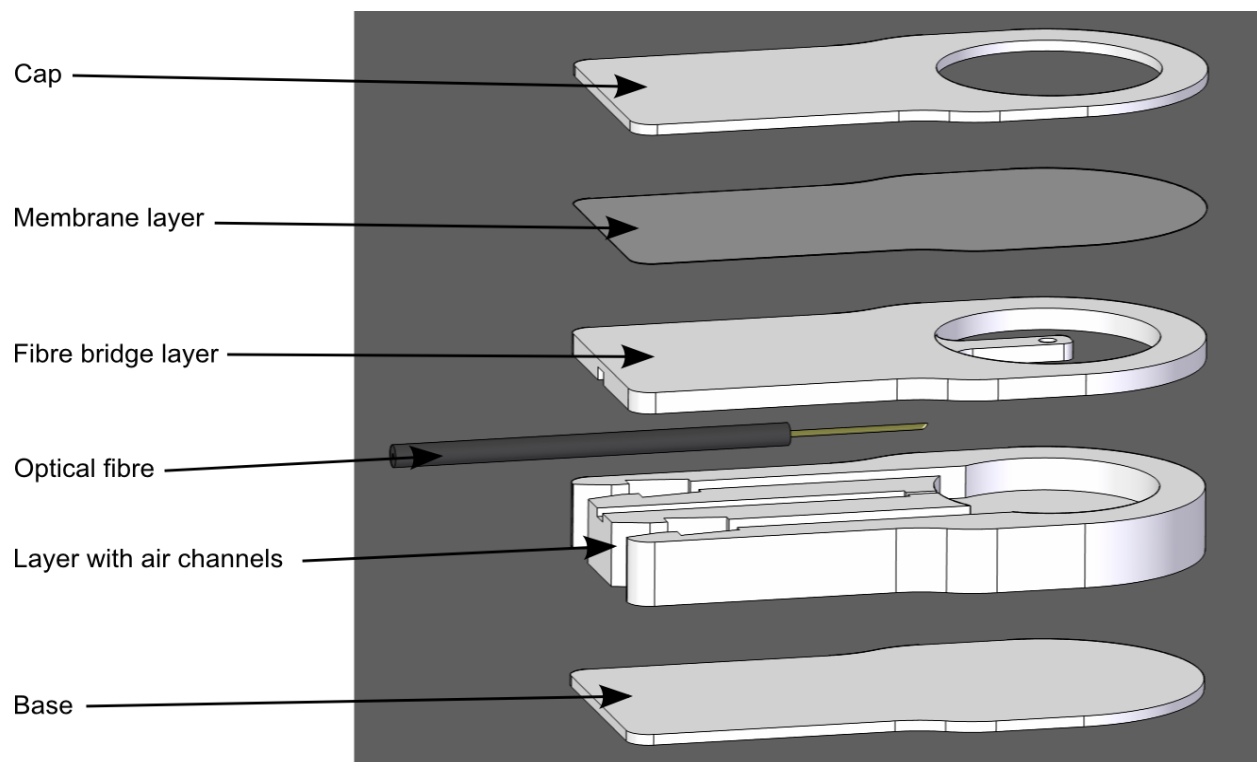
An exploded view of the sensor. The air supply tubing and fittings have been omitted for clarity.
